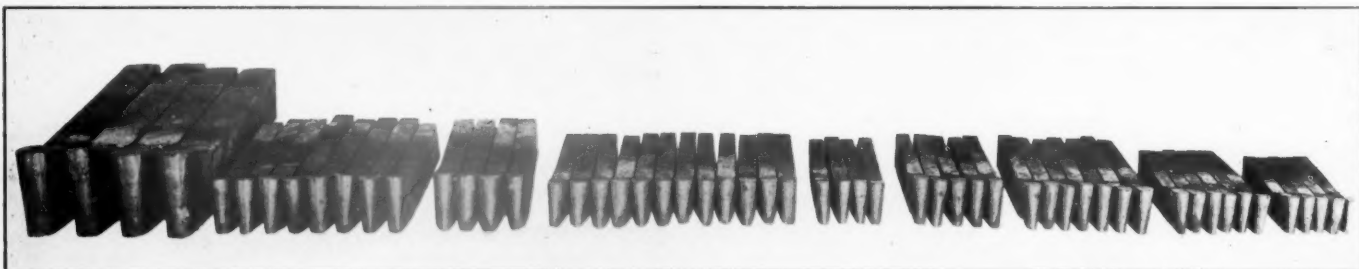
Group of Lathe Tools with High Speed Steel Welded Tips
